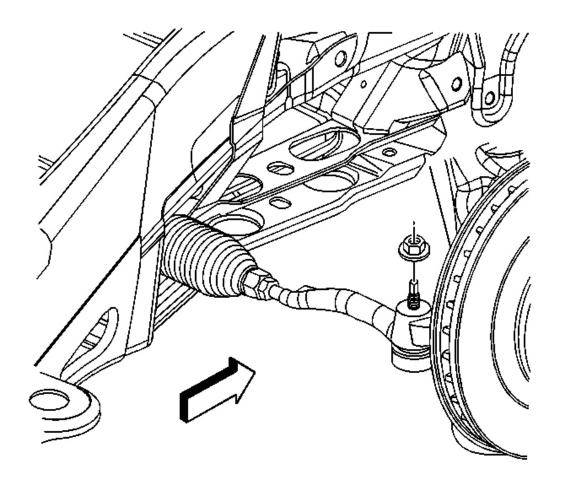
View Of Tie Rod Retaining Nut Courtesy of GENERAL MOTORS CORP.
